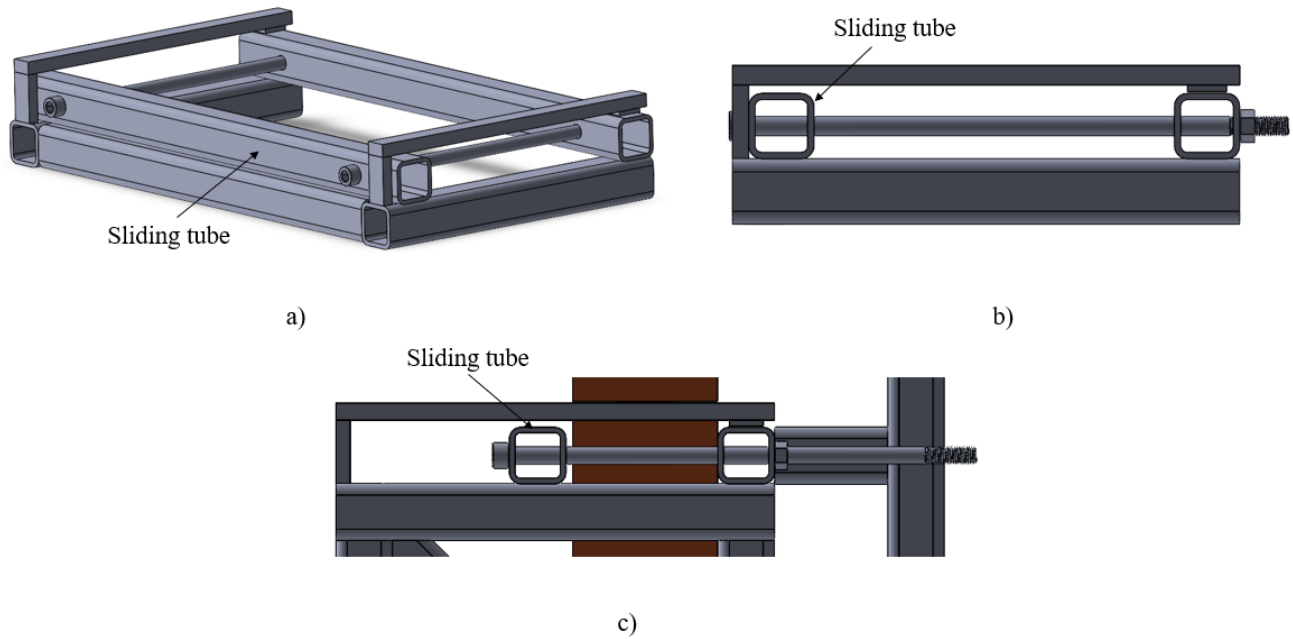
Clamping mechanism for prism restraint: a) General view, b) and c) Side views.
